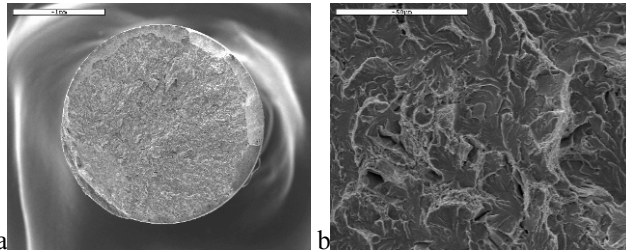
Brittle surface of fracture: a) general view, b) cleavage detail
